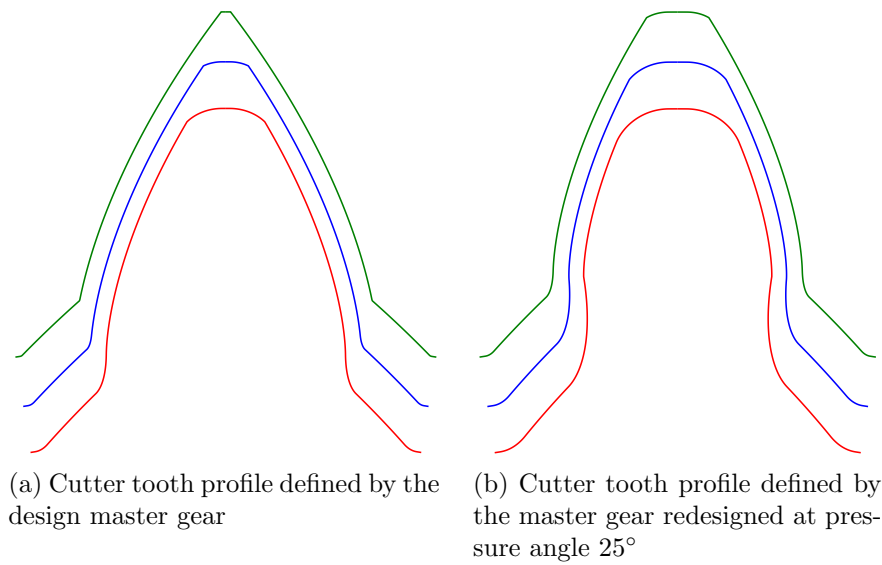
Cutter tooth profile design from master gear data and redesign at different pressure angle. Nominal tooth profile is shown in blue, new cutter in green and red is the profile at the end of the tool life (in this case at the distance of 16 mm from the front of the tool).
